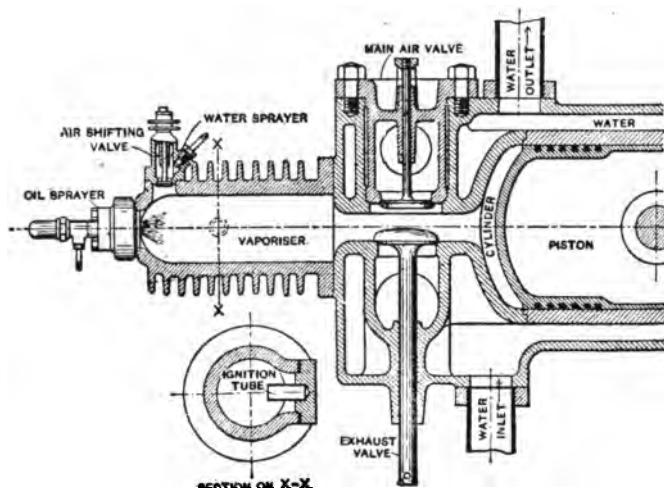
Section of New Crossley Vaporizer and Valve Chamber.
